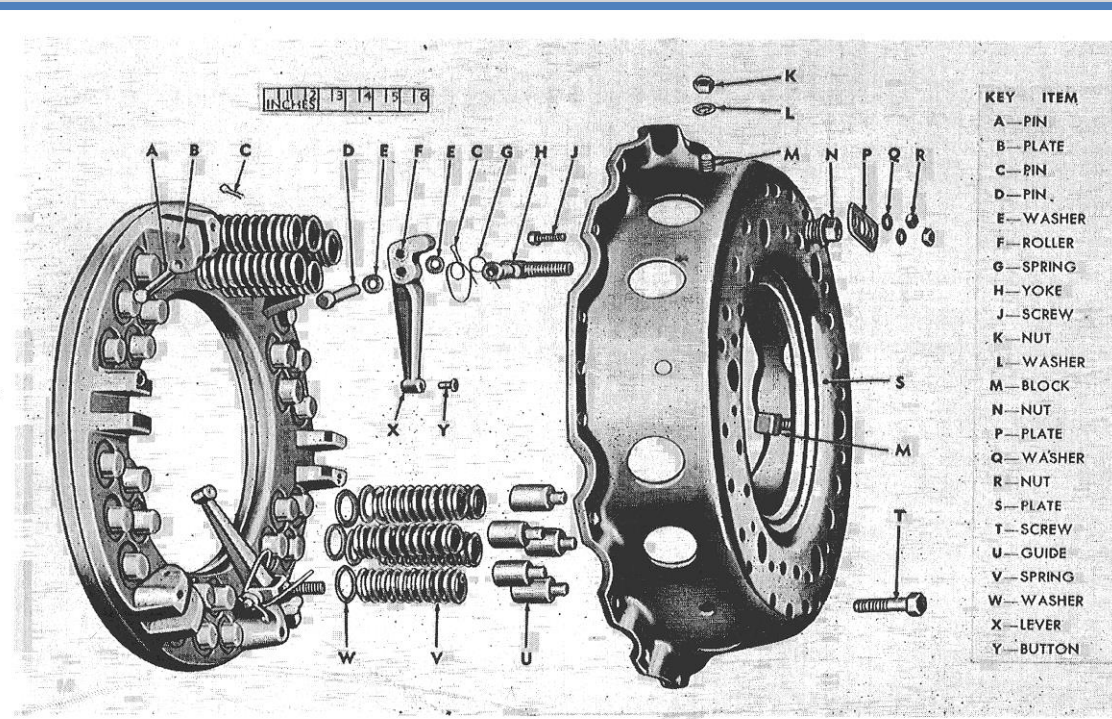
Engine clutch drive and pressure plates, exploded view.
